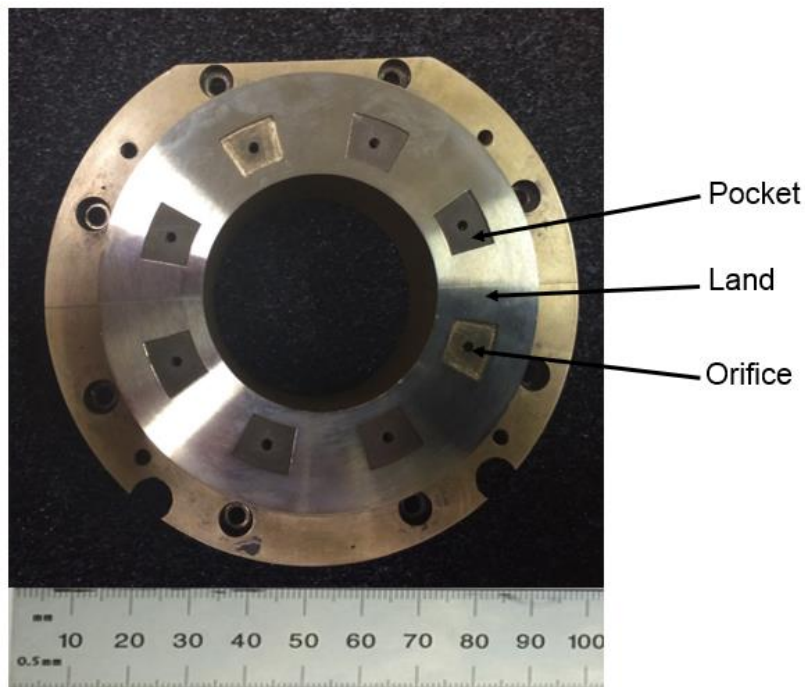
Photograph of current condition of slave thrust bearing with epoxy removed and lapped surface.
